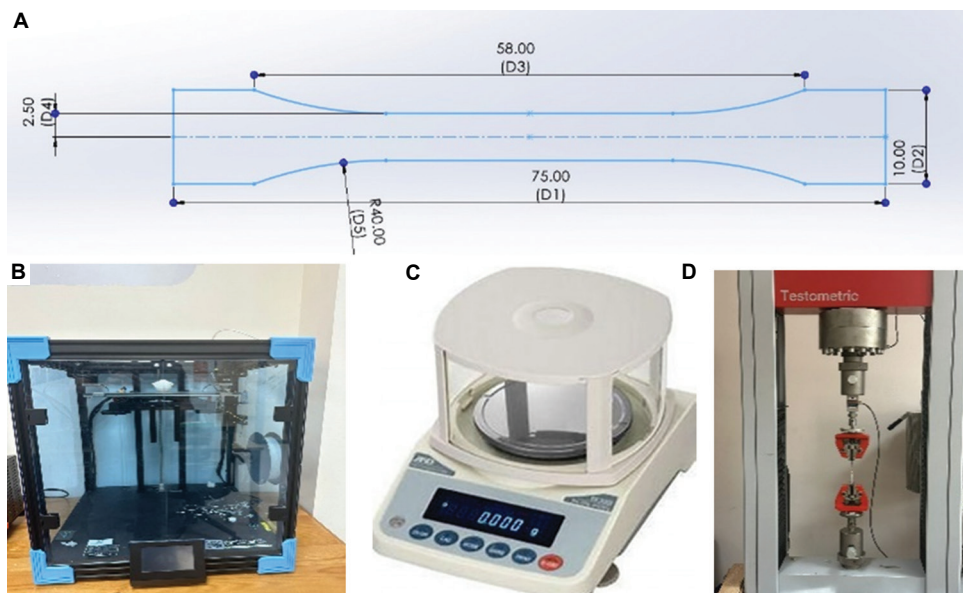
Specimen design and equipment used in the study. (A) Design of the test specimen (units in mm). (B) Fused deposition modeling 3D printer. (C) Digital weighing scale. (D) FS300CT testing machine
